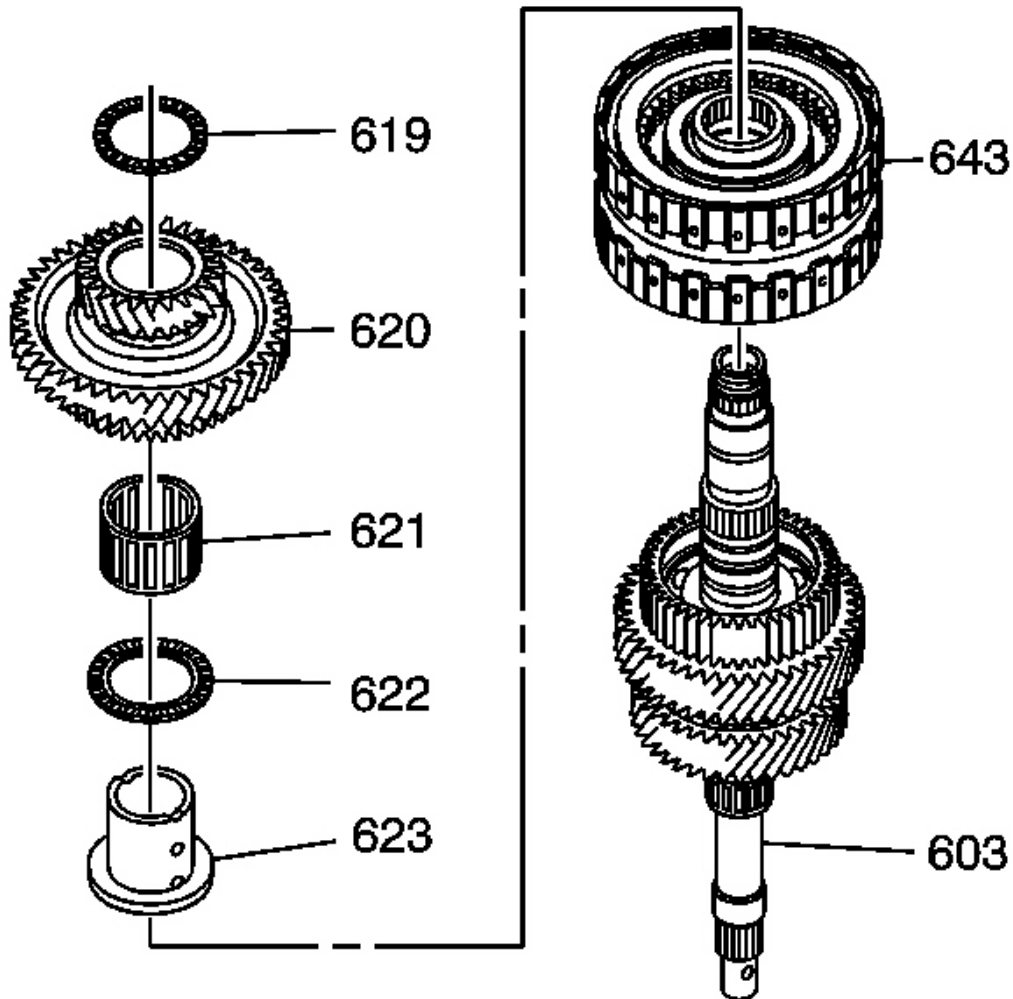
Installing 4th & 5th/Reverse Clutch Housing Assembly & Components
